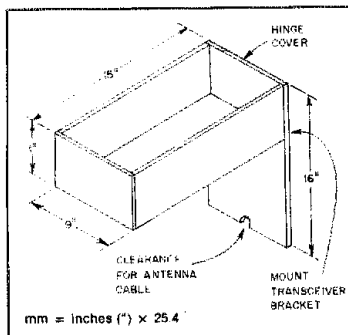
Construction details of the mobile desk. The dimensions should be adjusted to suit your car and rig.
